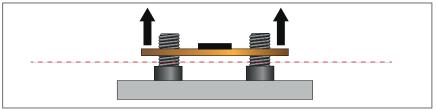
HV BM 1.2, power cables HV- (≤35 mm²), removing the shunt module from the threaded bolts
